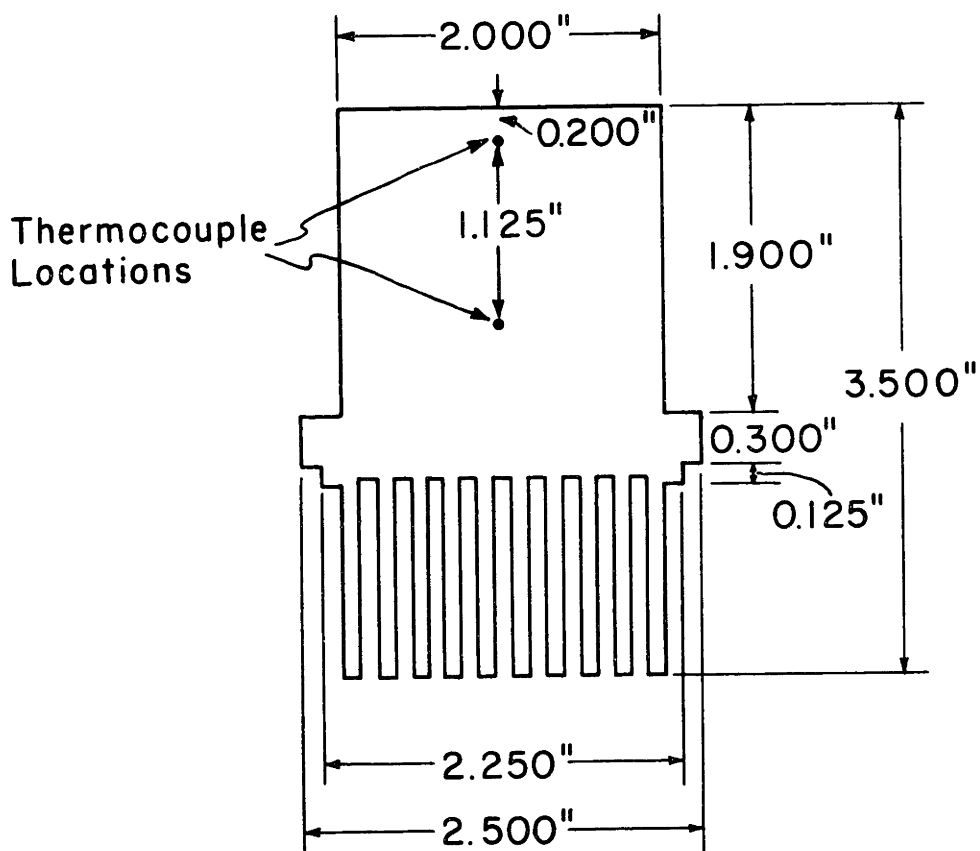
FIG. II TYPICAL COPPER HEATING BLOCK DESIGN
